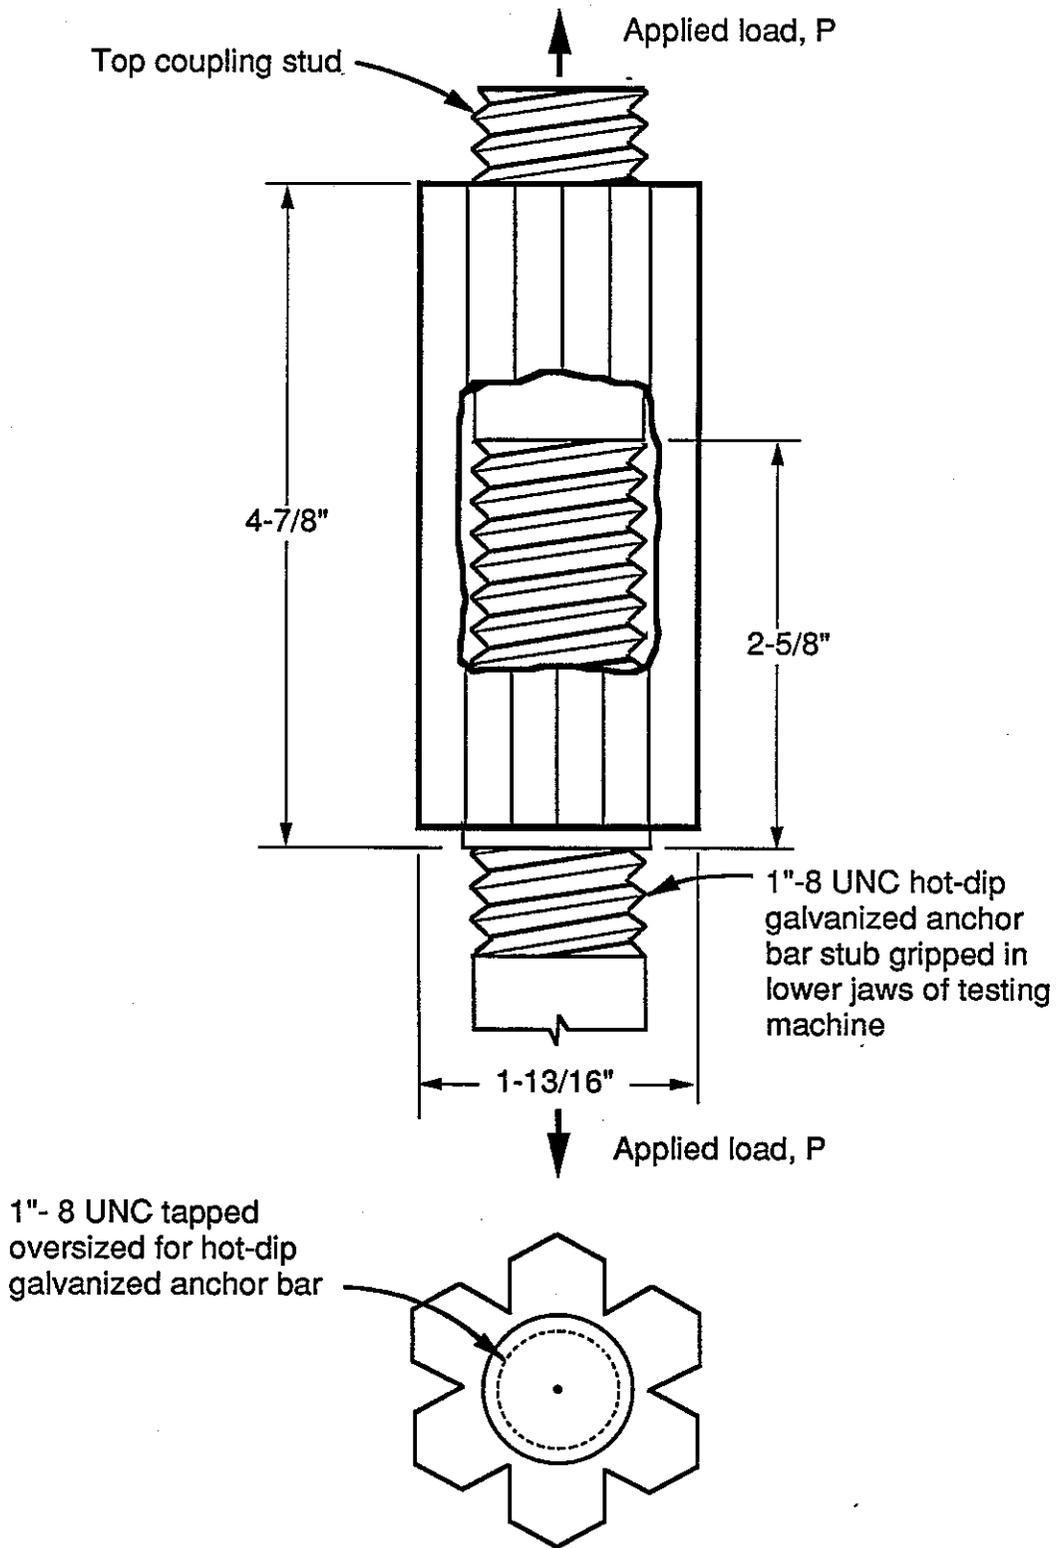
Test Fixture for Determining Tensile Strength of Aluminum Couplings
